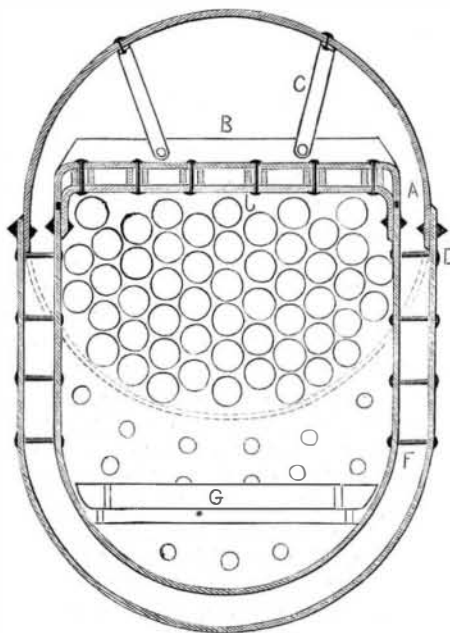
Section of Boiler through Firebox, showing Stays to the Crown Sheet.
